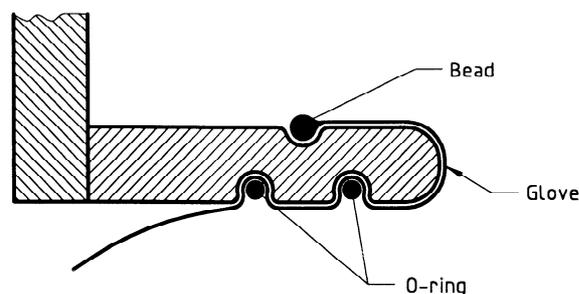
Method of glove attachment on ports having one external groove and two internal grooves
